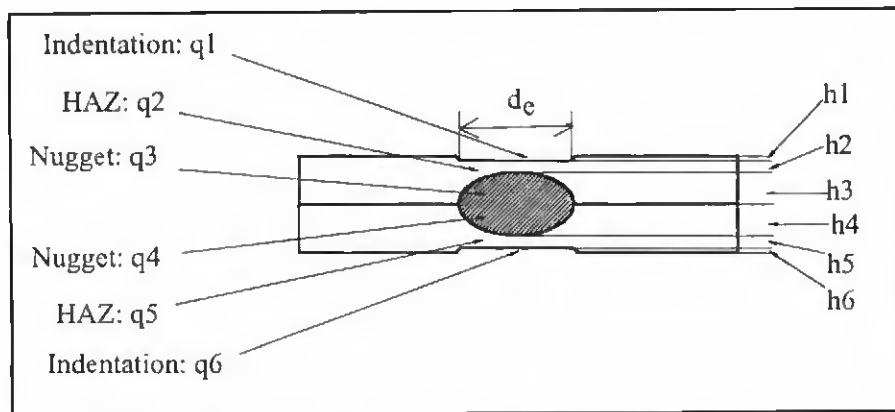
Partition of zones in a weldment for heat calculation. q = heat (Joules), h = thickness (mm).
